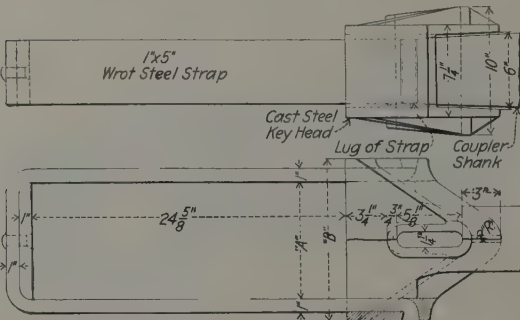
Composite Coupler Yoke. Gould Coupler Company.
